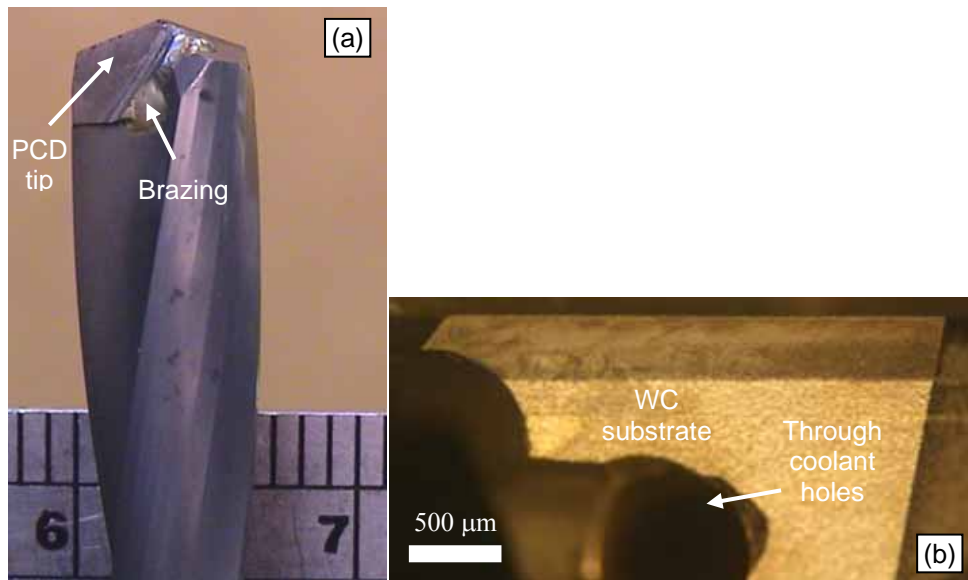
Brazed PCD drill used in Phase 3B: (a) side view and (b) end view
